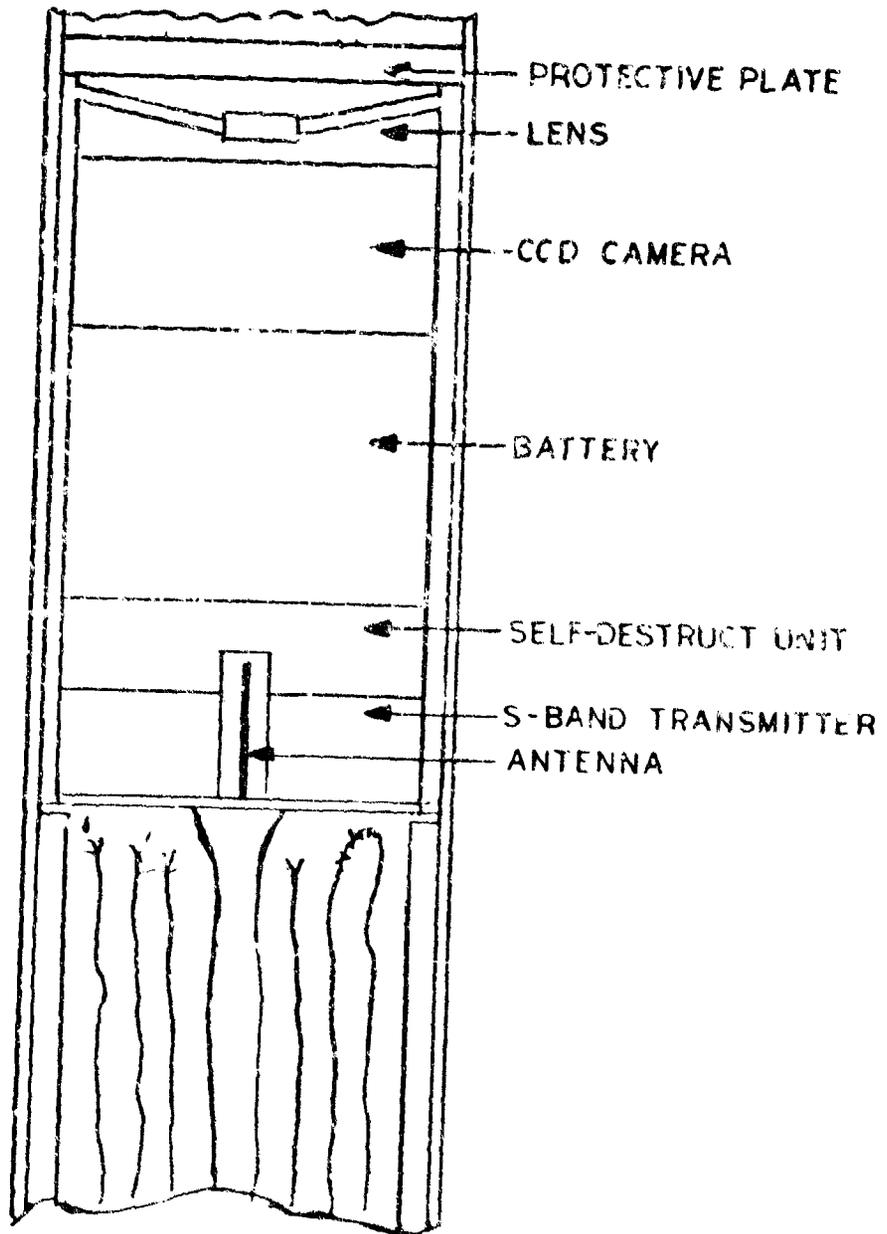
CCD CAMERA-TRANSMITTER ASSEMBLY
